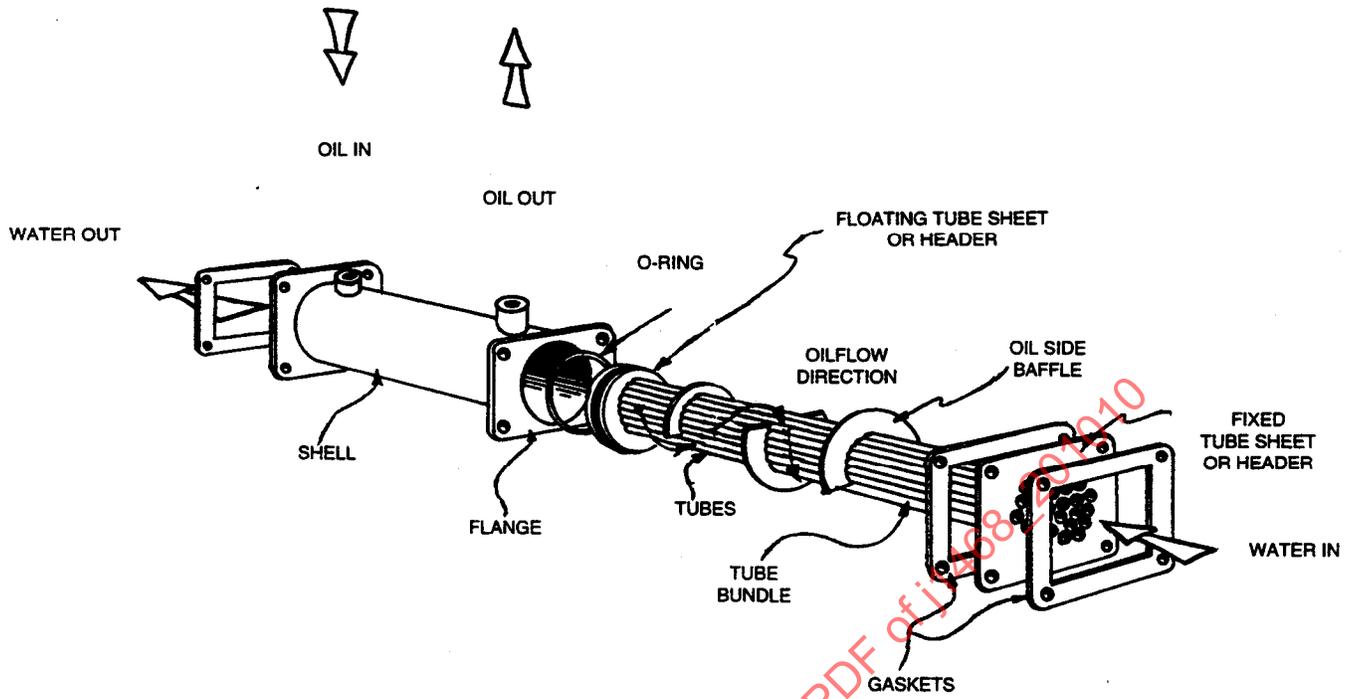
SHELL AND TUBE REMOVABLE BUNDLE OIL TO WATER COOLER
